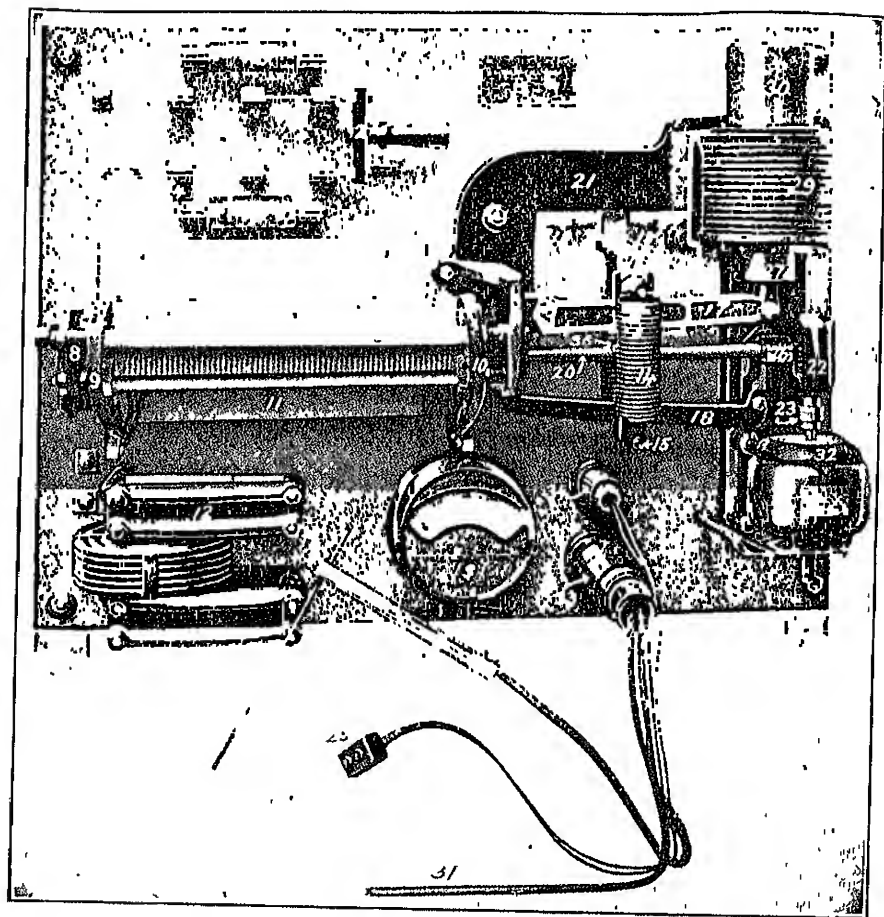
Welding and Cutting Panel for Wilson Set.
